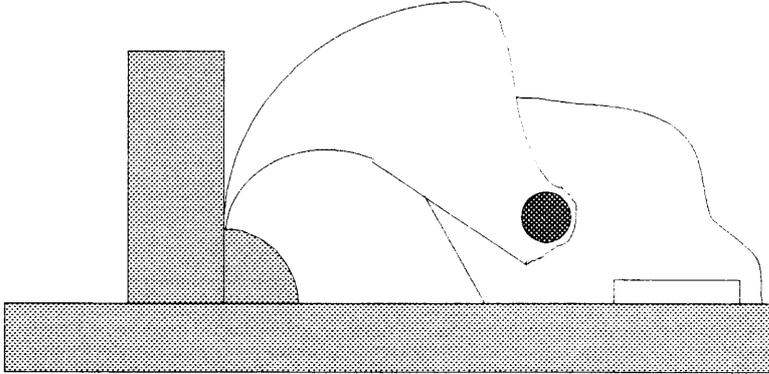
Measurement of leg length of a fillet weld
